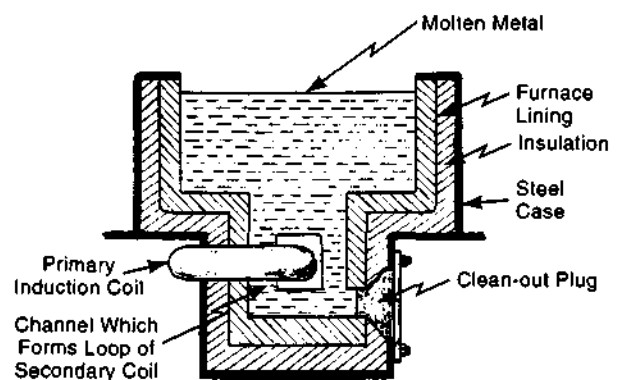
A5-1 A channel-type induction furnace. The molten metal in the furnace becomes the loop of a secondary induction coil.
